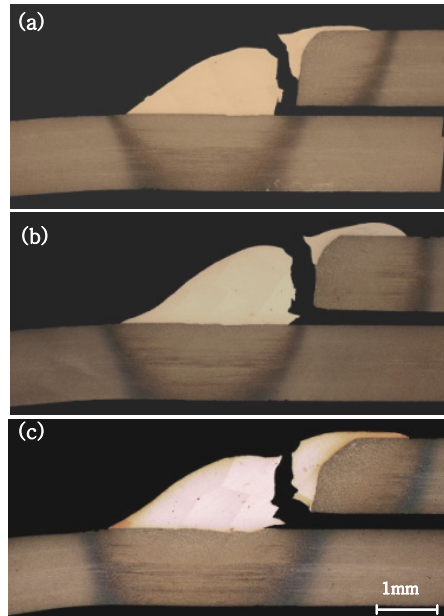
OM images for cross section of fractured specimens with brazing current: (a) 60A, (b) 70A, (c) 80A
